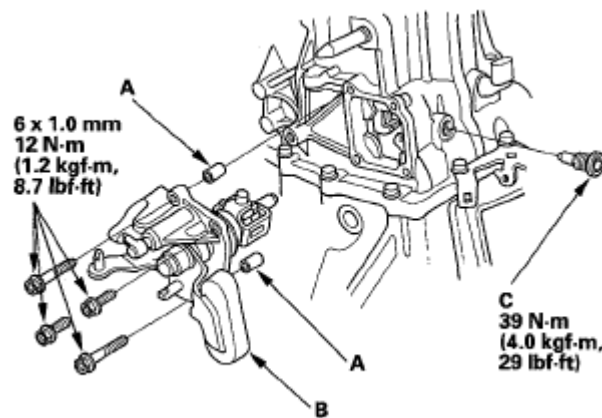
Identifying Dowel Pins And Lever Assembly With Torque Specifications
